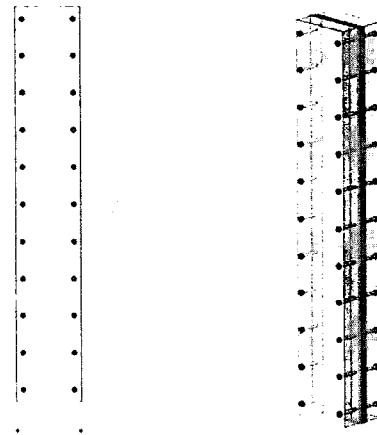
Front and isometric view of the flat plate fuel-assembly-model, dimensions are in millimetres.
